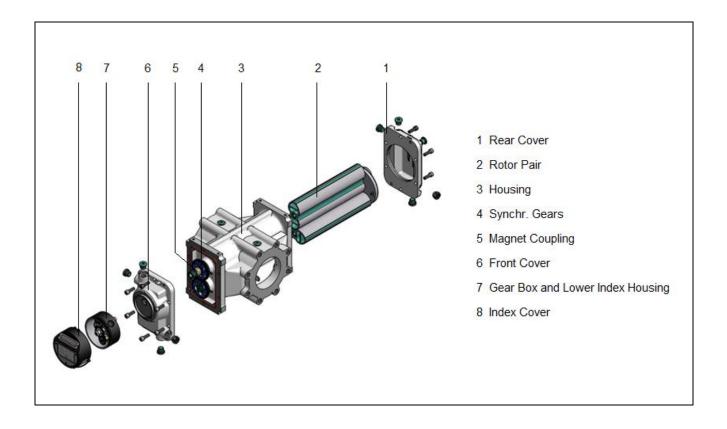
Exploded view of the OMEGA VI DN100 (4")
